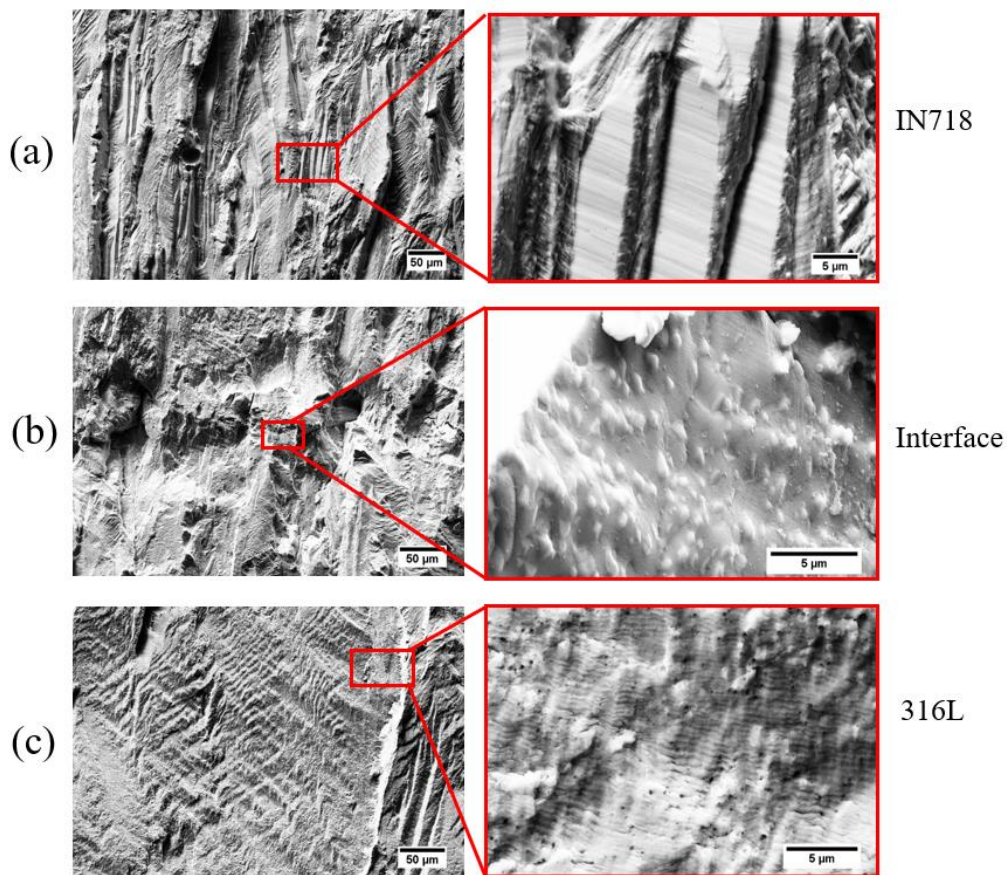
SEM view of specimen N°1 fracture surface, magnified view of a) IN718 top layer, b) Interface, and c) 316L bottom layer.
